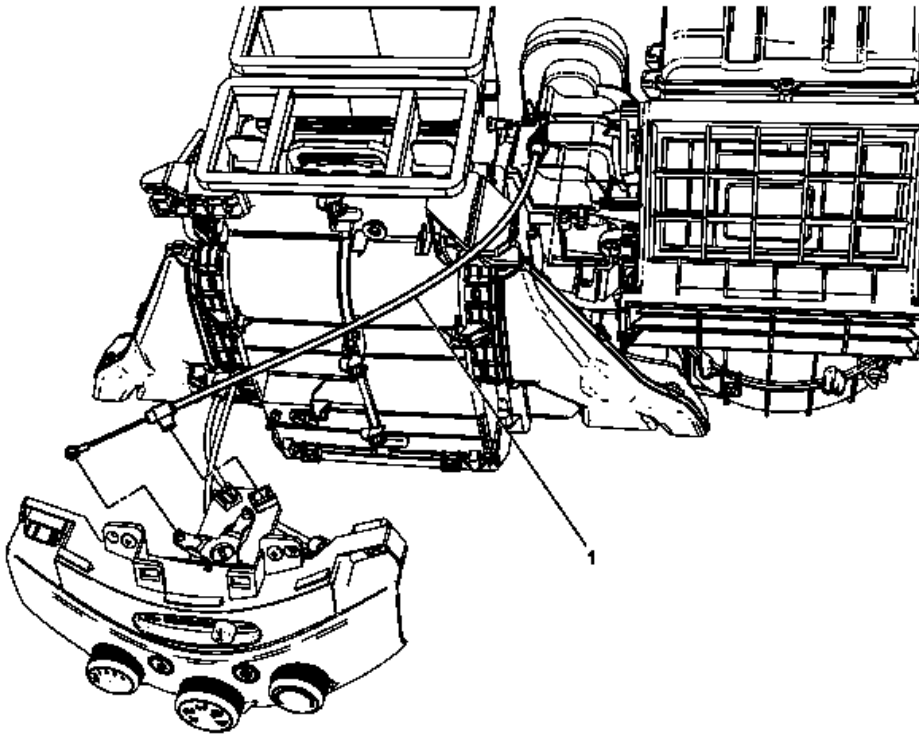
Inside Air Recirculating Control Cable (Left Hand Drive)
